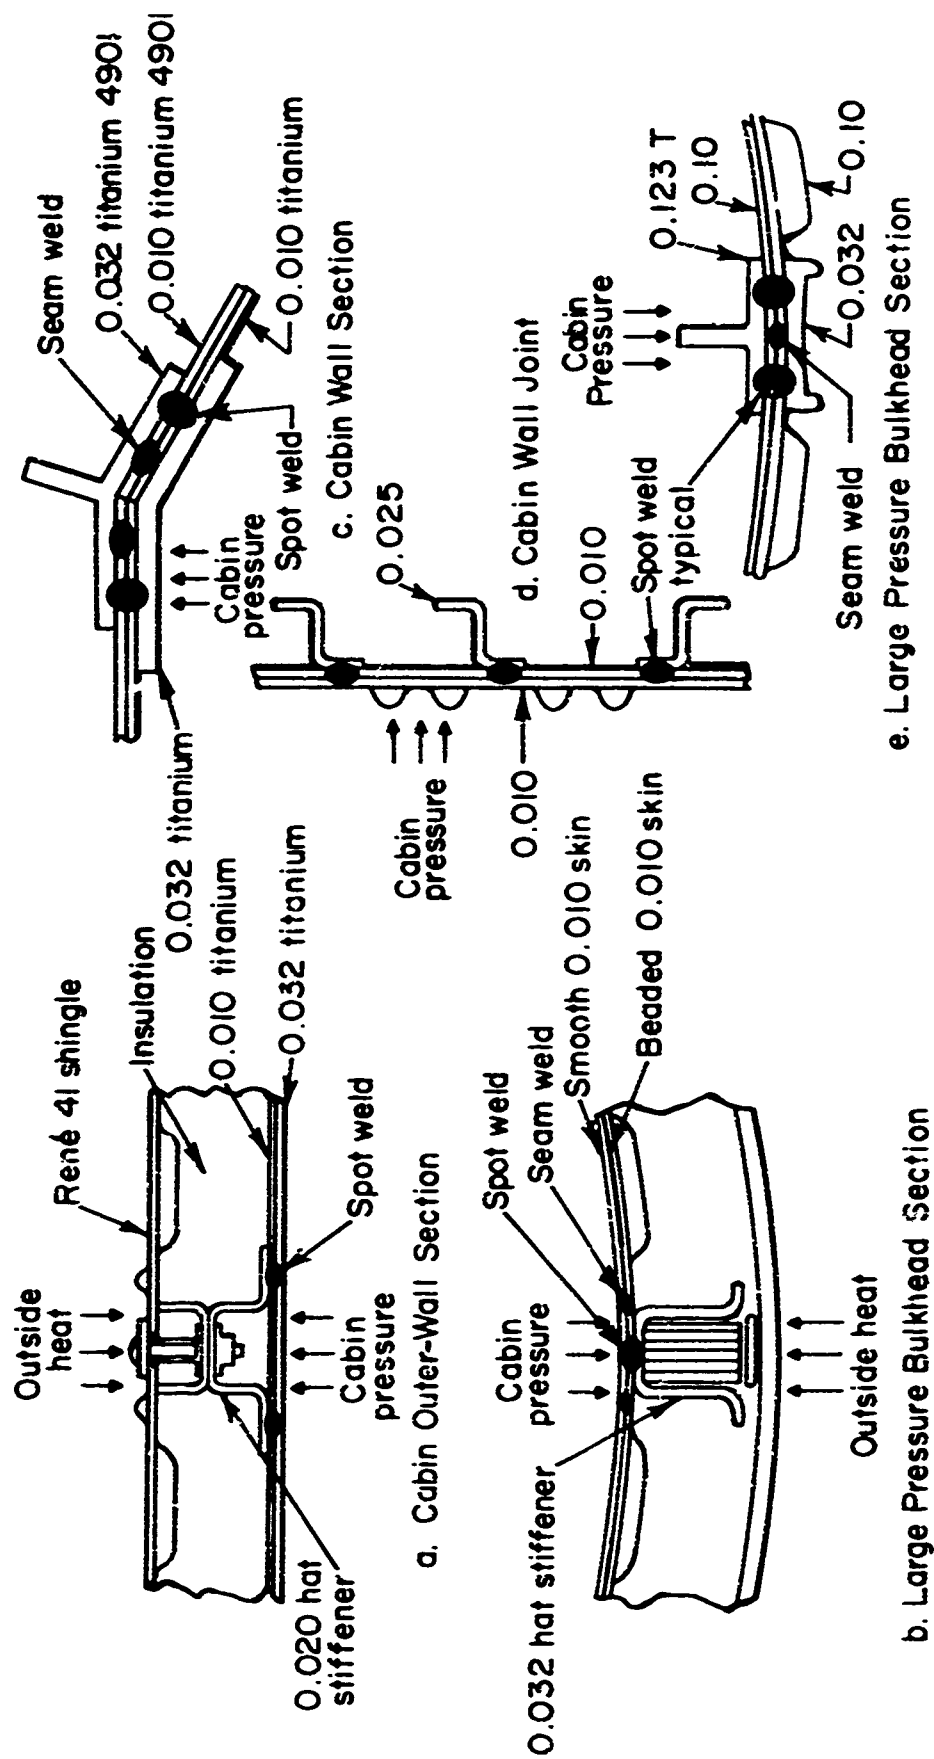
SPOT WELDING ATTACHES STIFFENERS TO SIDEWALL SKIN ASSEMBLY OF THE MERCURY CAPSULE (REF. 52)
